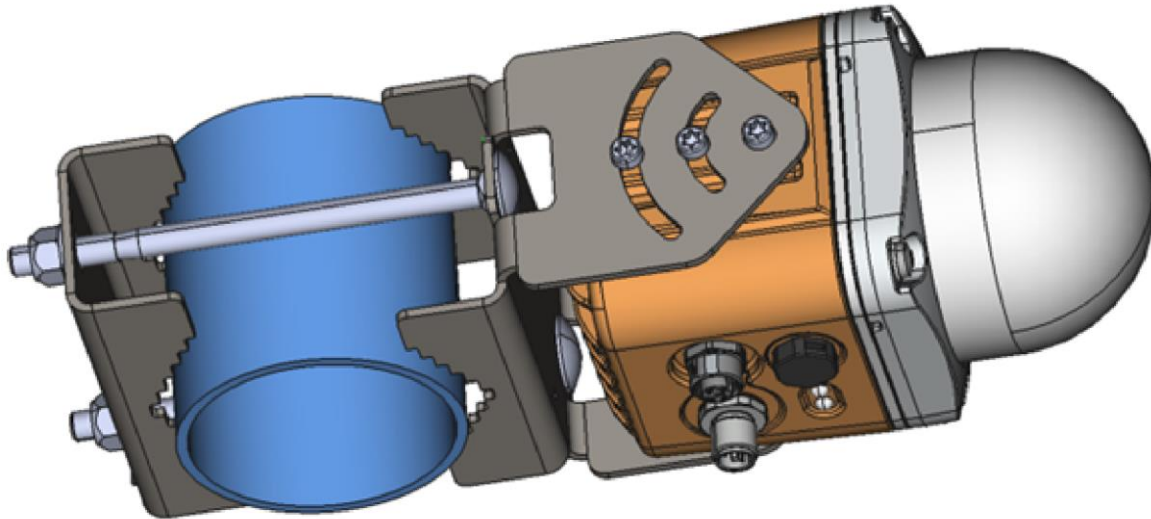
LPR<sup>®</sup>-1DHP-291 mounted to a pipe with the mounting bracket
